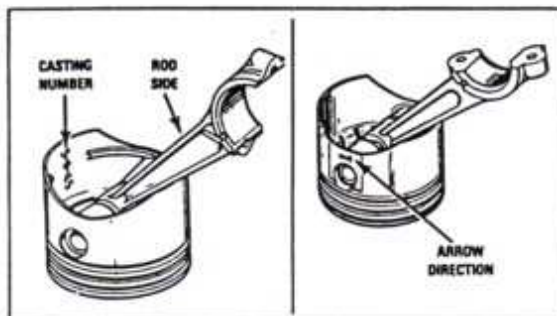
A - On Models VM70, HM70, HM80, HM100 and VM100, install piston on rod with arrow or casting number positioned as shown.
